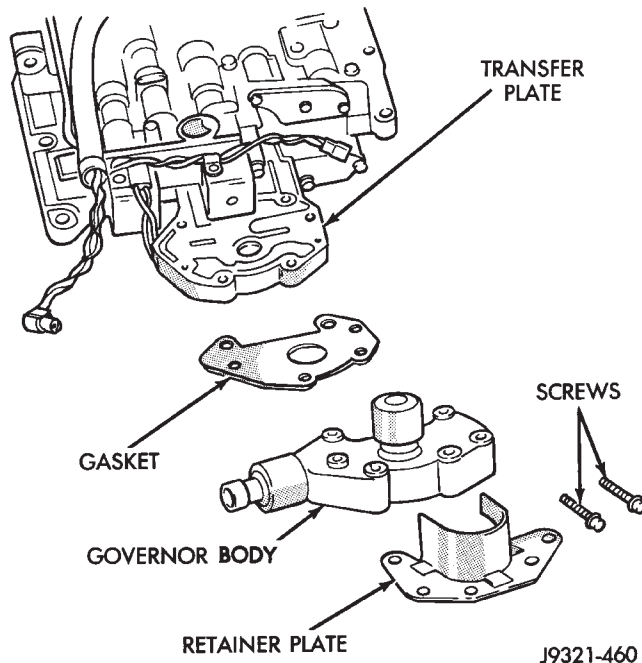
Governor Body, Retainer Plate And Gasket Removal
